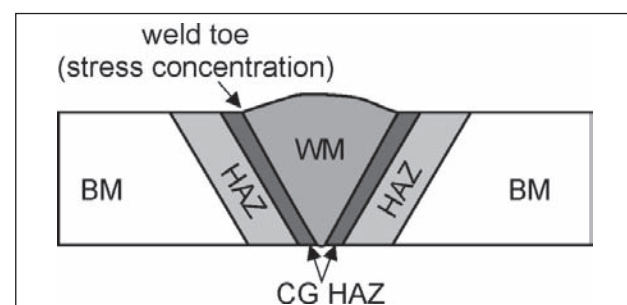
Welded joint; BM (base material), HAZ (heat affected zone), WM (weld material)
